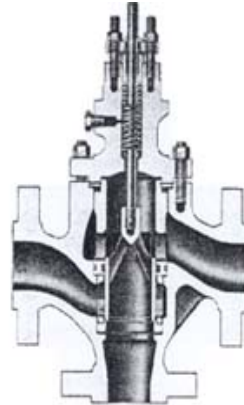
Three-Way Valve with Balanced Valve Plug
